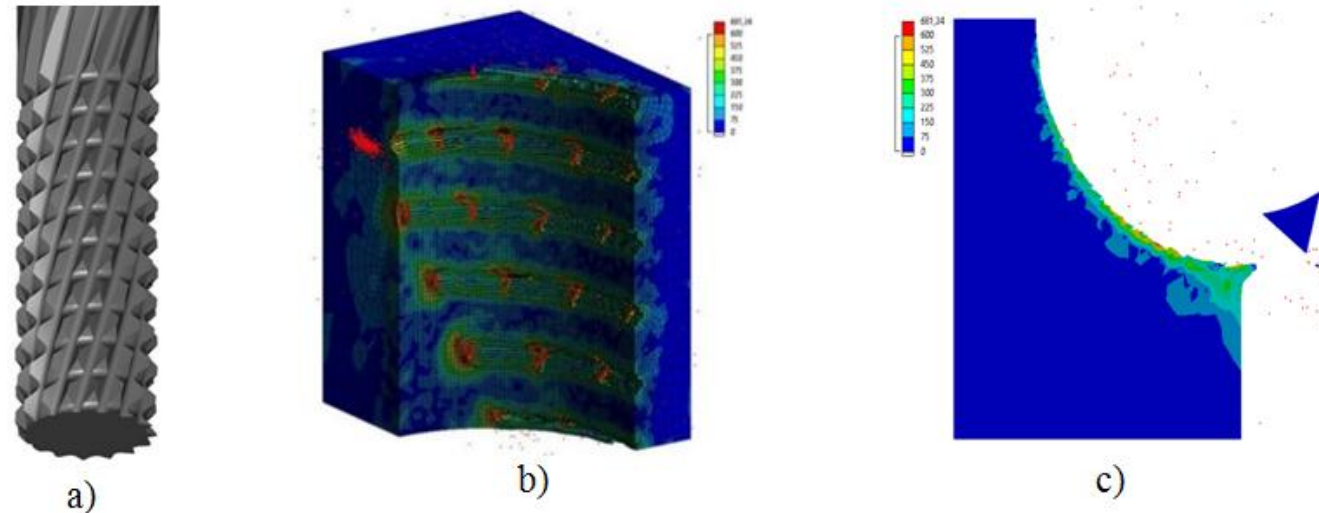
Milling cutter model (a) and calculation results: (b) - cutting scheme and stresses in the contact zone; (c) - a single cycle of cutting with a cutter tooth and illustrated of chip formation
